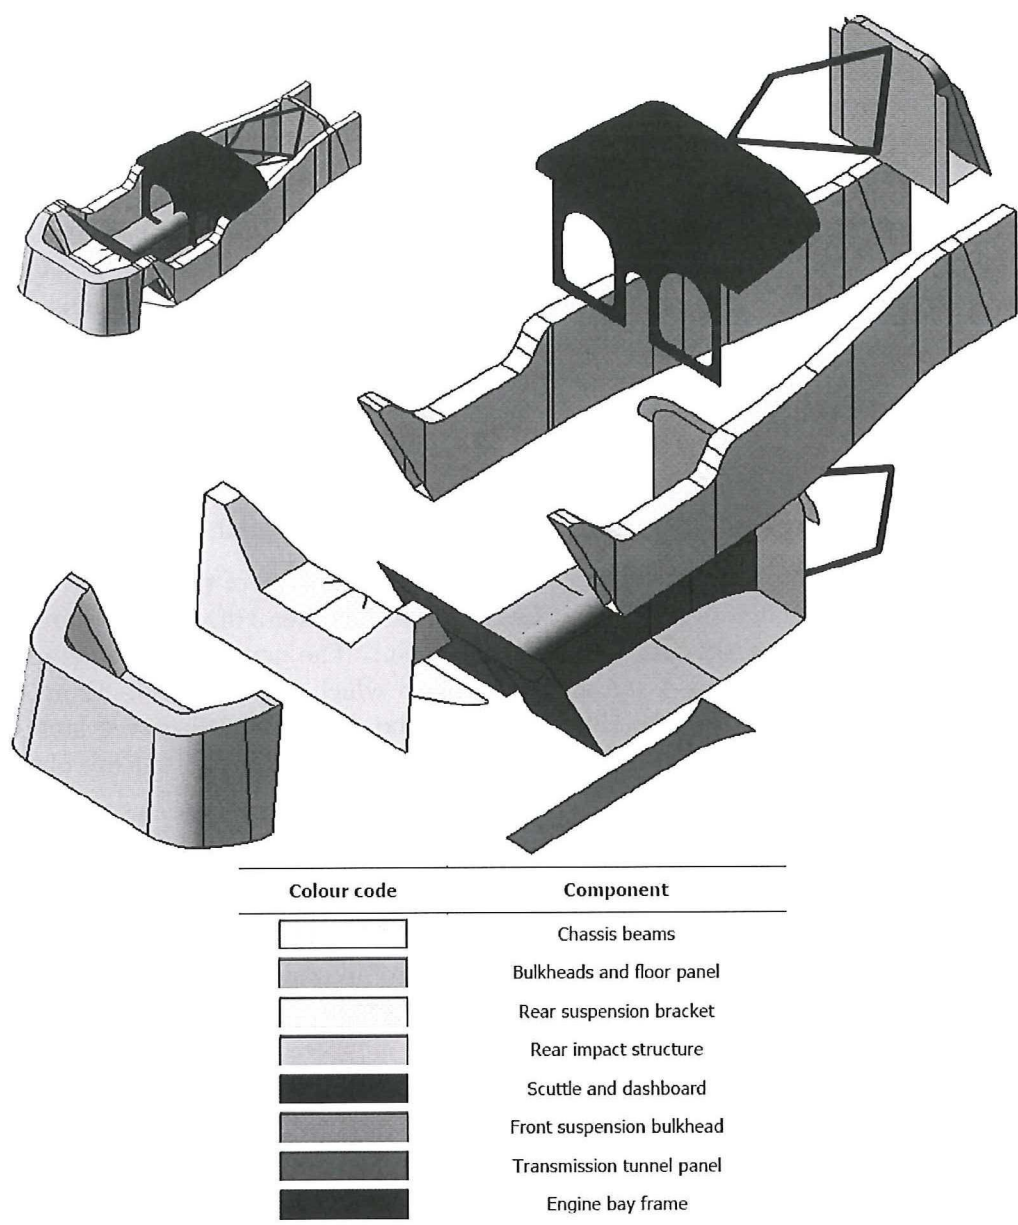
Exploded view of preliminary V-Cart design[58]
